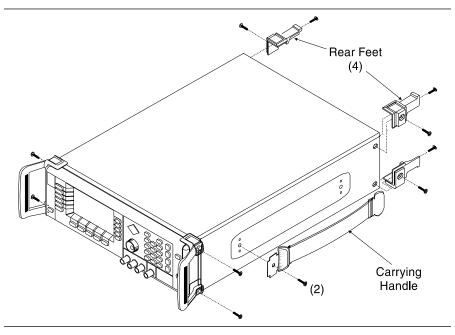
Front Handle, Feet, and Carrying Handle Removal
